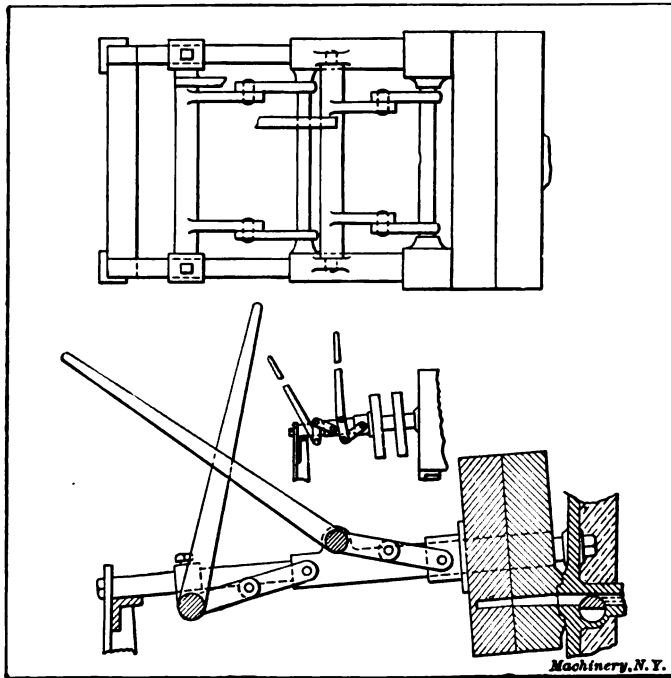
Toggle-joint Arrangement for Parting the Mold and Drawing it away from the Spout
